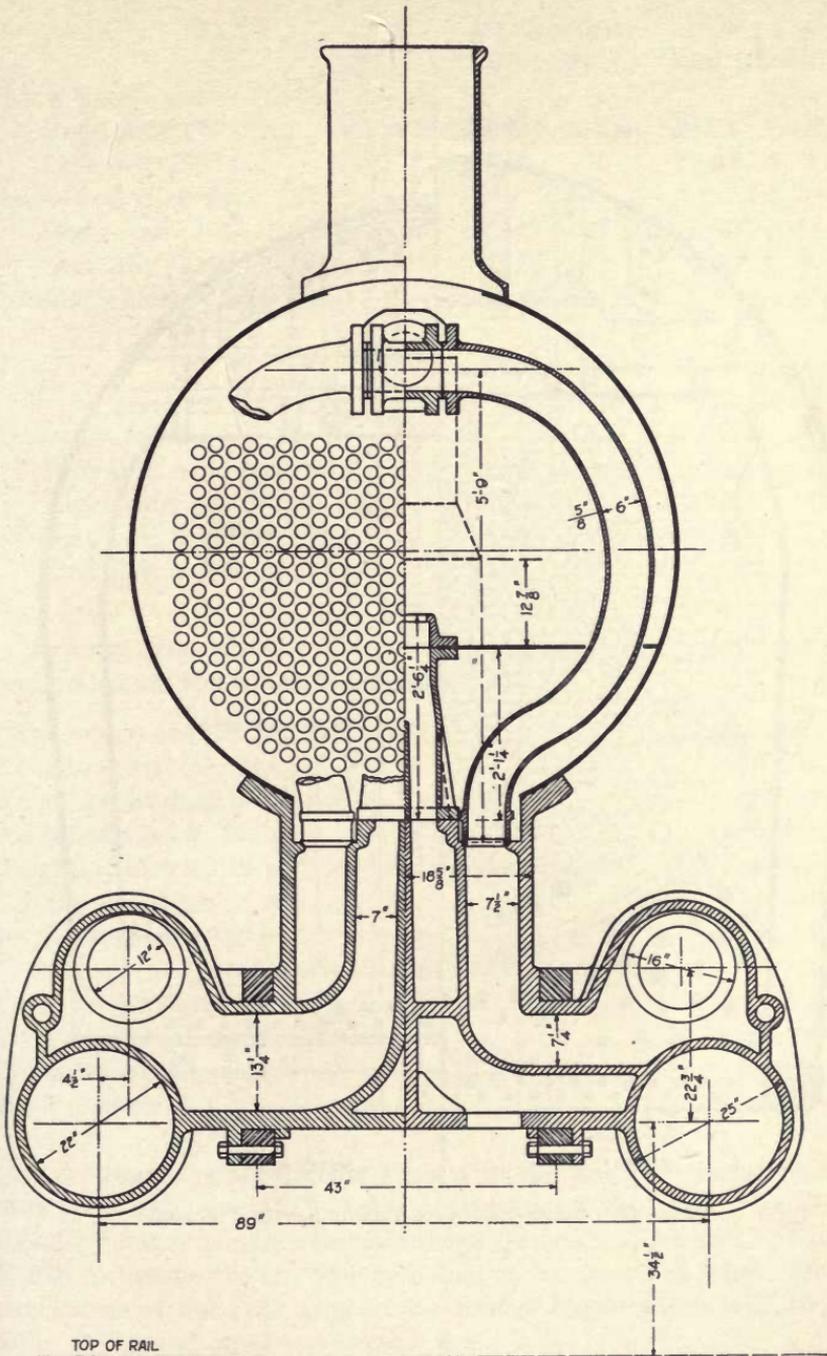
CROSS SECTION THROUGH THE FRONT-END AND CYLINDERS.
